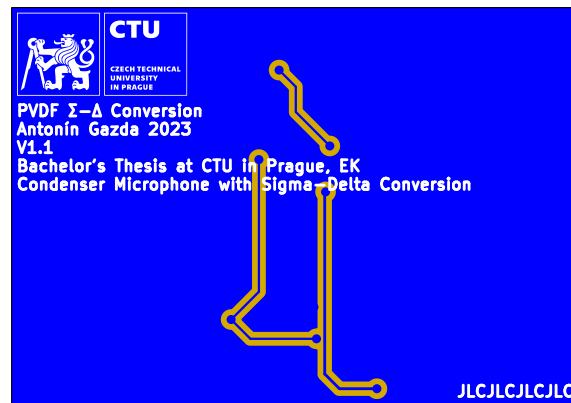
Bottom 2D view of the designed PVDF Sigma-Delta converter PCB
